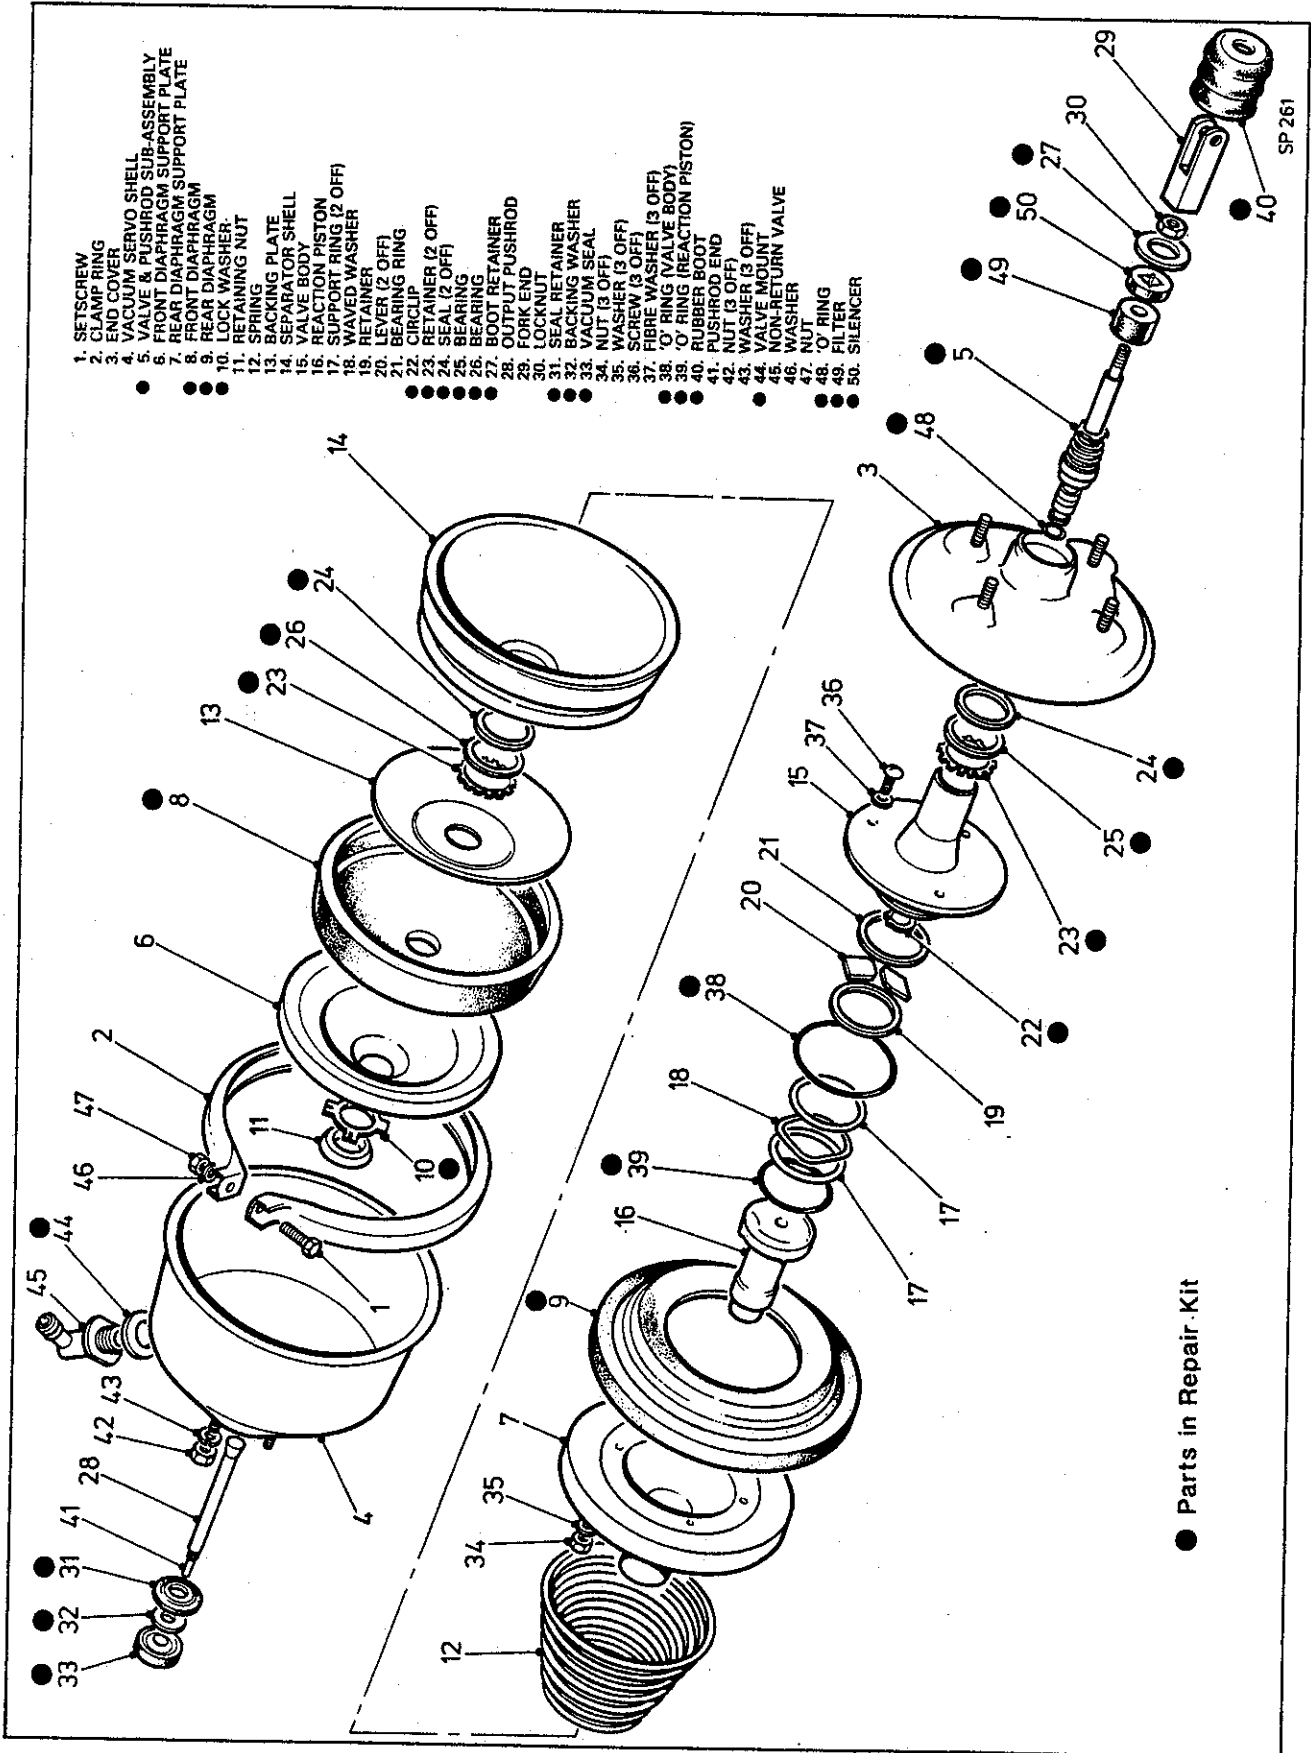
Exploded View of 2/50 Direct Acting Servo Assembly
